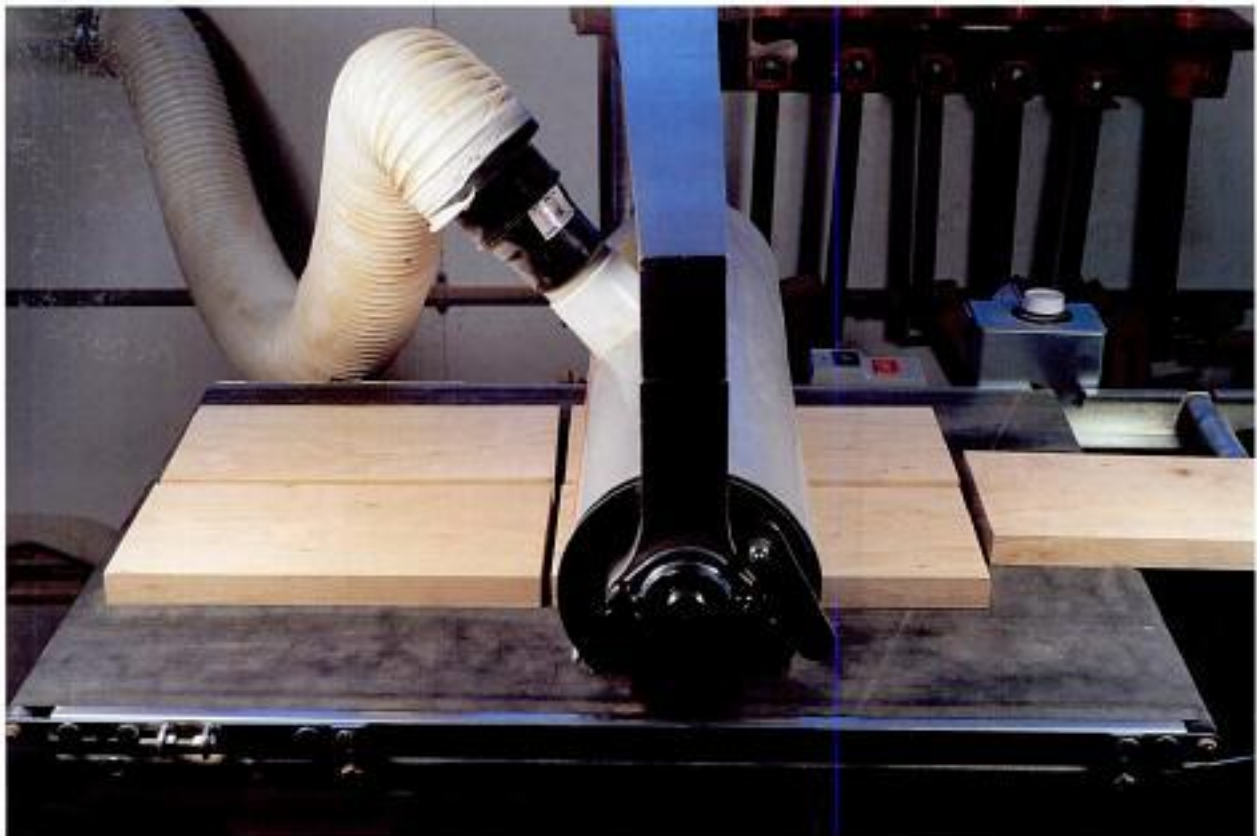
If you use a thickness sander to smooth out planer ridges, cut longer boards to size first. This will pre-
